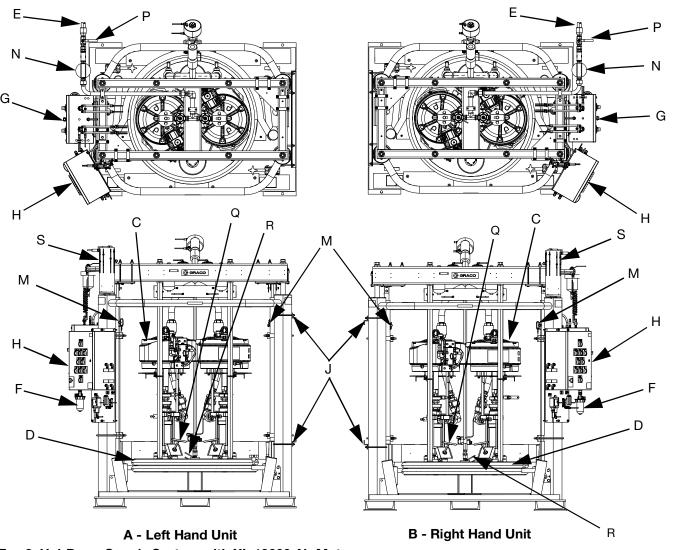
Uni-Drum Supply System with XL 10000 Air Motors
